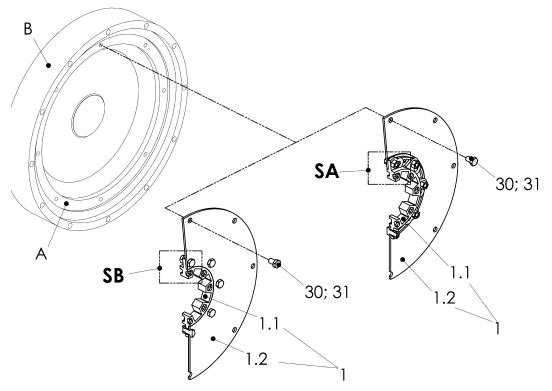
Mounting the pre-mounted elastic element (1)
